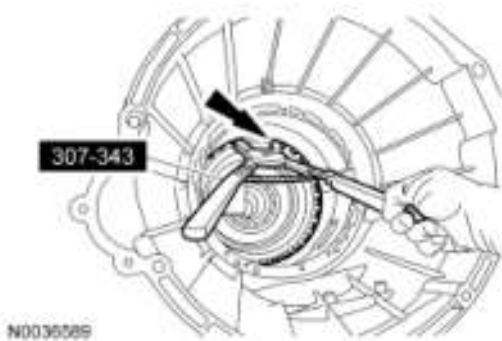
Removing Center Support Snap Ring Using Special Tool (307-343)
